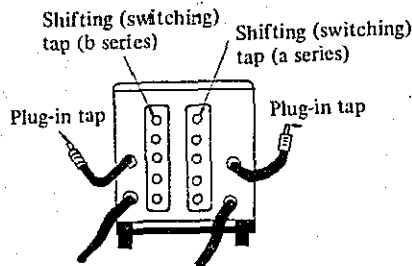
Separate leg coil winding type (tap type) welding machine
